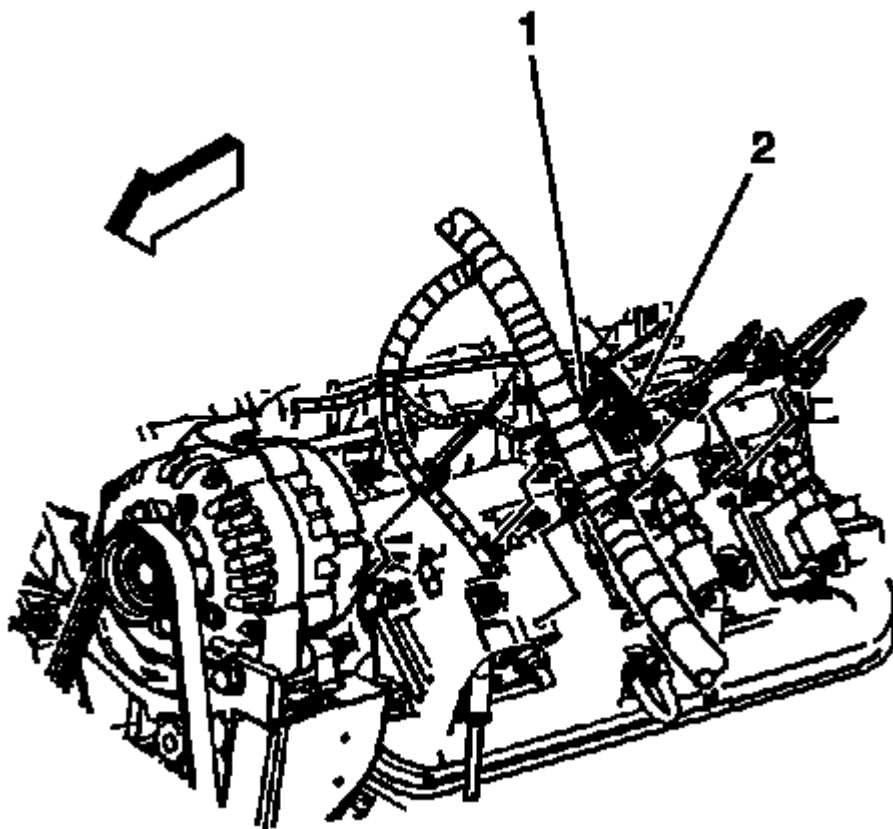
View Of Main Ignition Coil Wire Harness Connector & Clips
